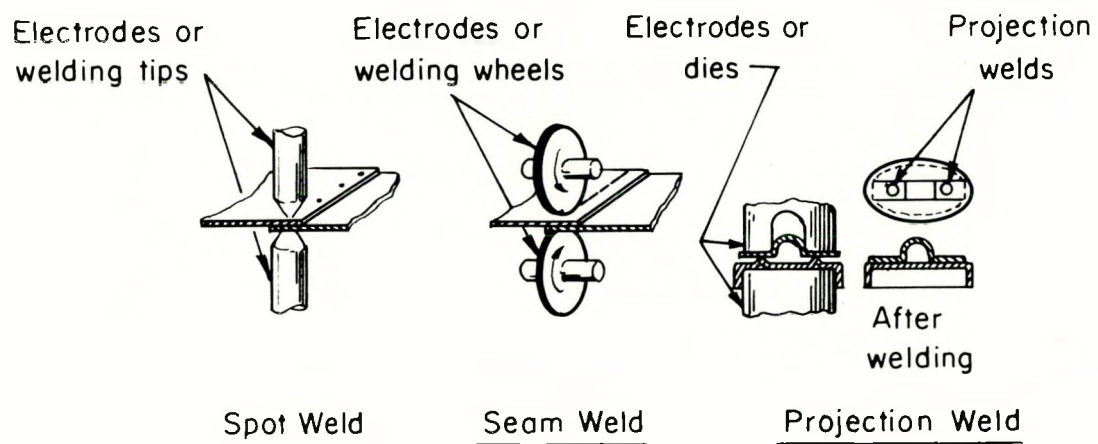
SKETCHES SHOWING CHARACTERISTICS OF SPOT, SEAM, AND PROJECTION WELDING (Ref. 26)
